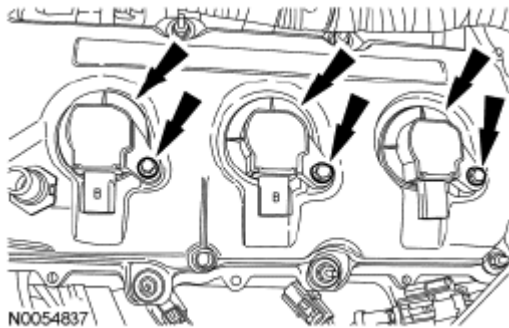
Locating Bolts And Coil-On-Plug Assemblies
